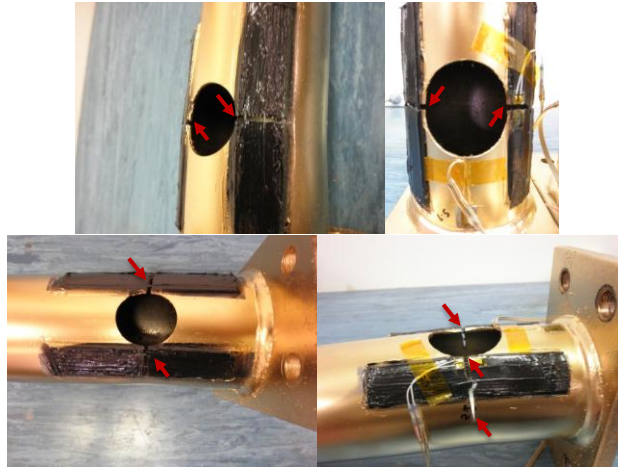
Fatigue failure at the cutout for different specimens.
